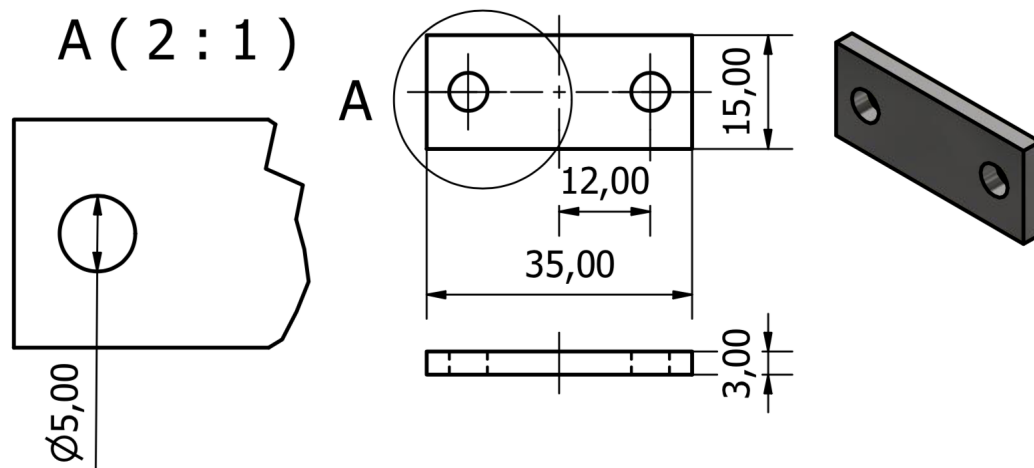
Dimensions diagram in millimeters for the pressing brackets of the Rogowski coils system.
